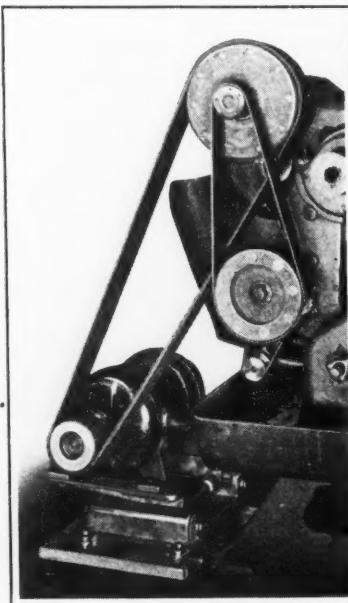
Short-center Drive with Base-floor Mounting, Installed on a Turret Lathe
